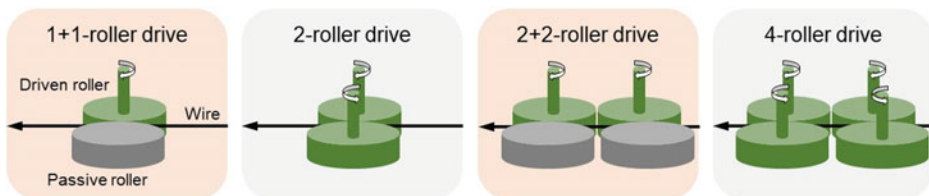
Roller drive setups for conveying and feeding wire-shaped materials
